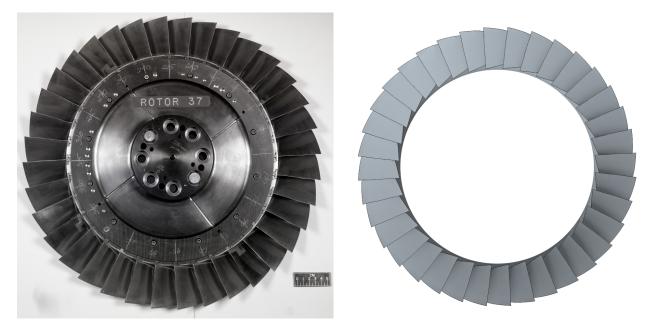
Rear view of the NASA Rotor 37 experimental rotor [22]
